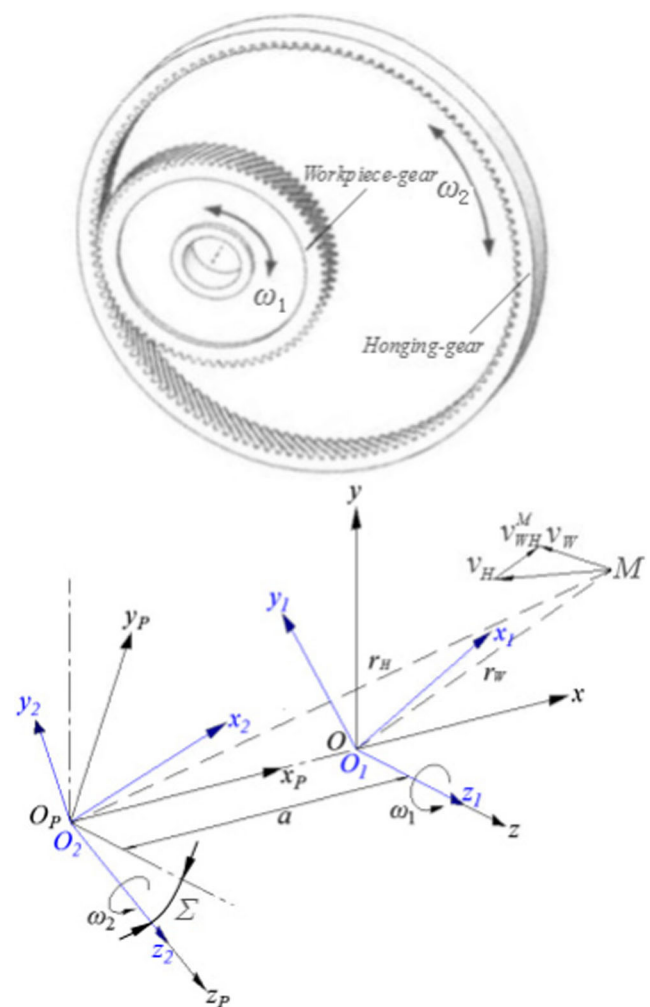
Spatial coordinate system of internal gear honing wheel and workpiece gear
